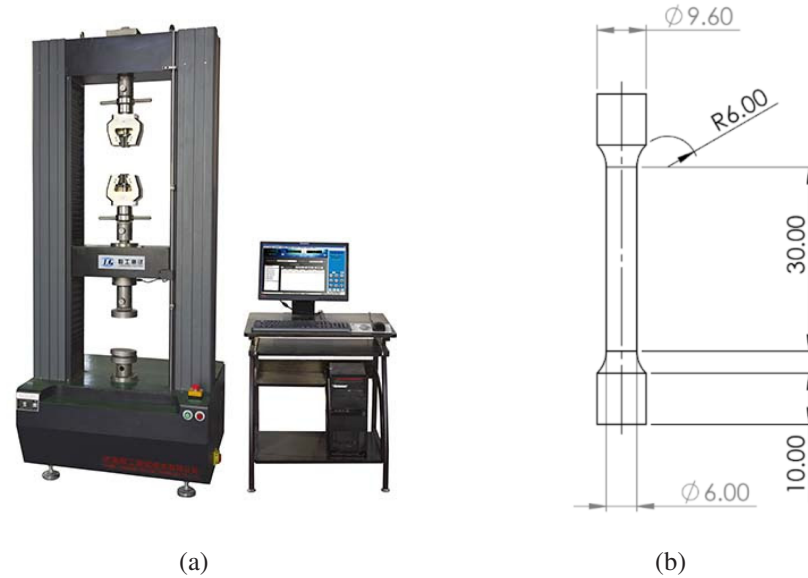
Tensile testing (a) CMT Electronic Universal Testing Machine, (b) Drawing of the tensile test specimen- ASTM E8. Dimensions are in mm
